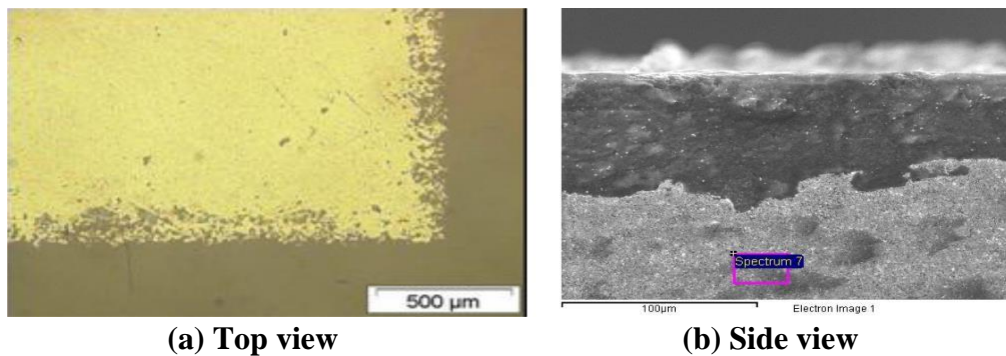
EDM wire-cutting damaged layer of the PCD small pieces.
